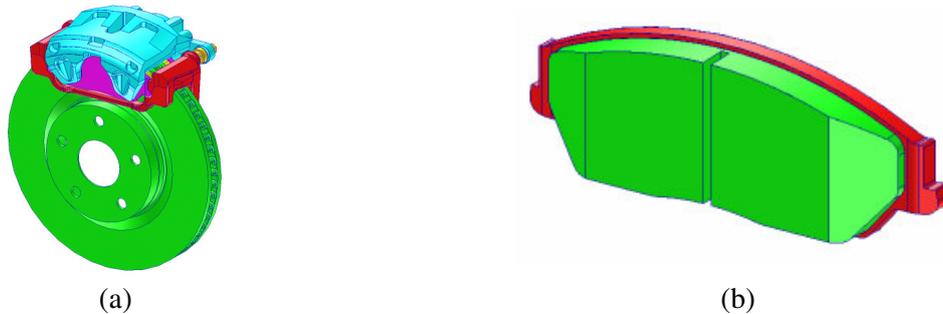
(a) Example brake system used in the case study. (b) Brake pad with 20mm chamfer
